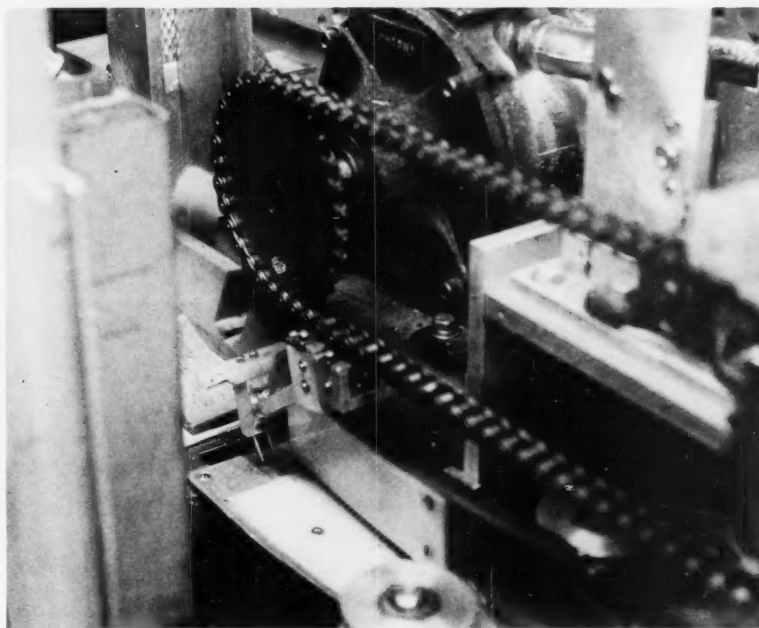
The device for transferring the fish from the header to the cleaning machine.
